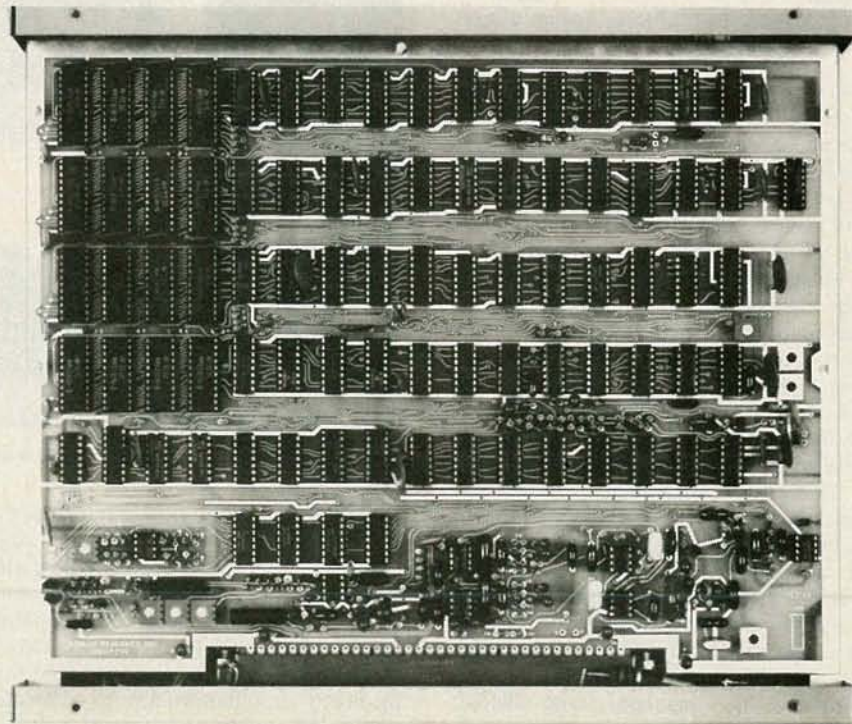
THIS PHOTO shows how the main board should look when it is correctly assembled. It is shown here mounted in the enclosure.
